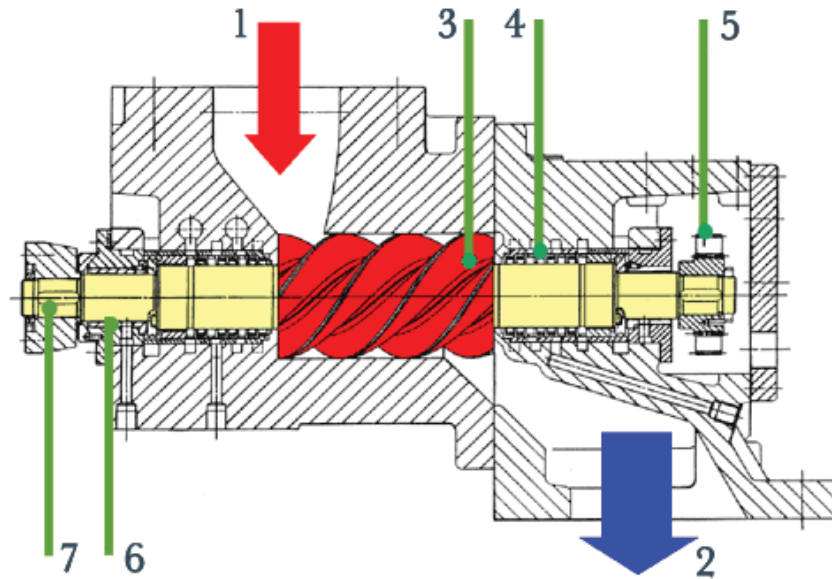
Cross Section of a Screw Expansion Machine⁵⁸
